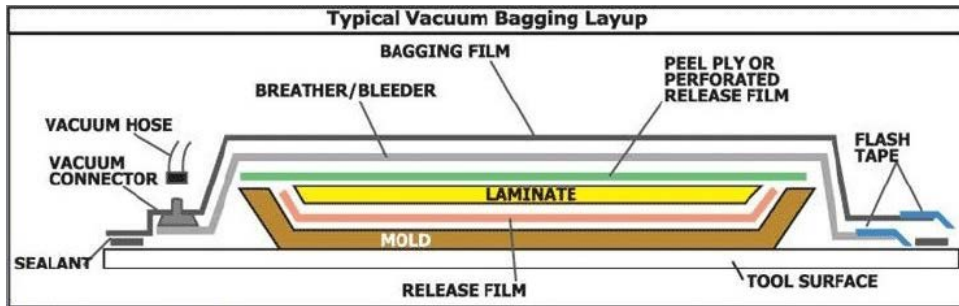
This image shows a method of "bagging without a bag", meaning that the mold itself serves as half of the bag, and the bag material is sealed to the mold, around the flange. Of course, you could just place your entire mold inside a large bag and seal it, too. [15]
